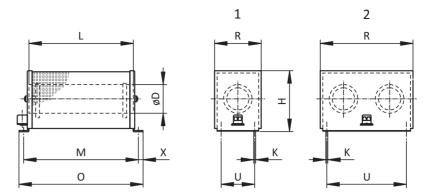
FZMU (1), FZZMU (2) dimensional drawing
